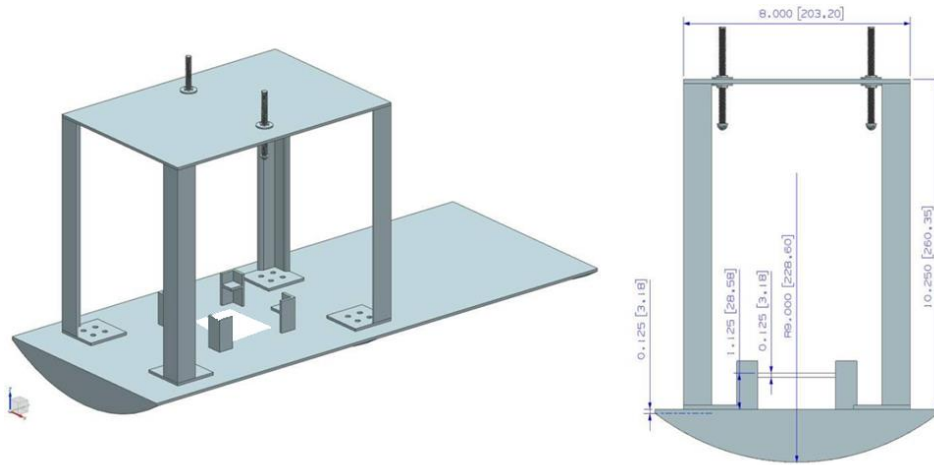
7: Stainless steel stand for the HHFTF assembly.
